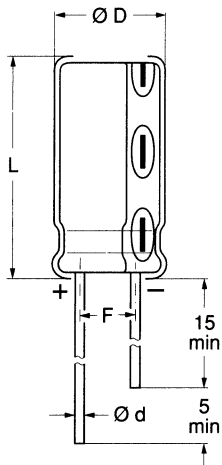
Form CA, long leads; see Table 2 for dimensions.
